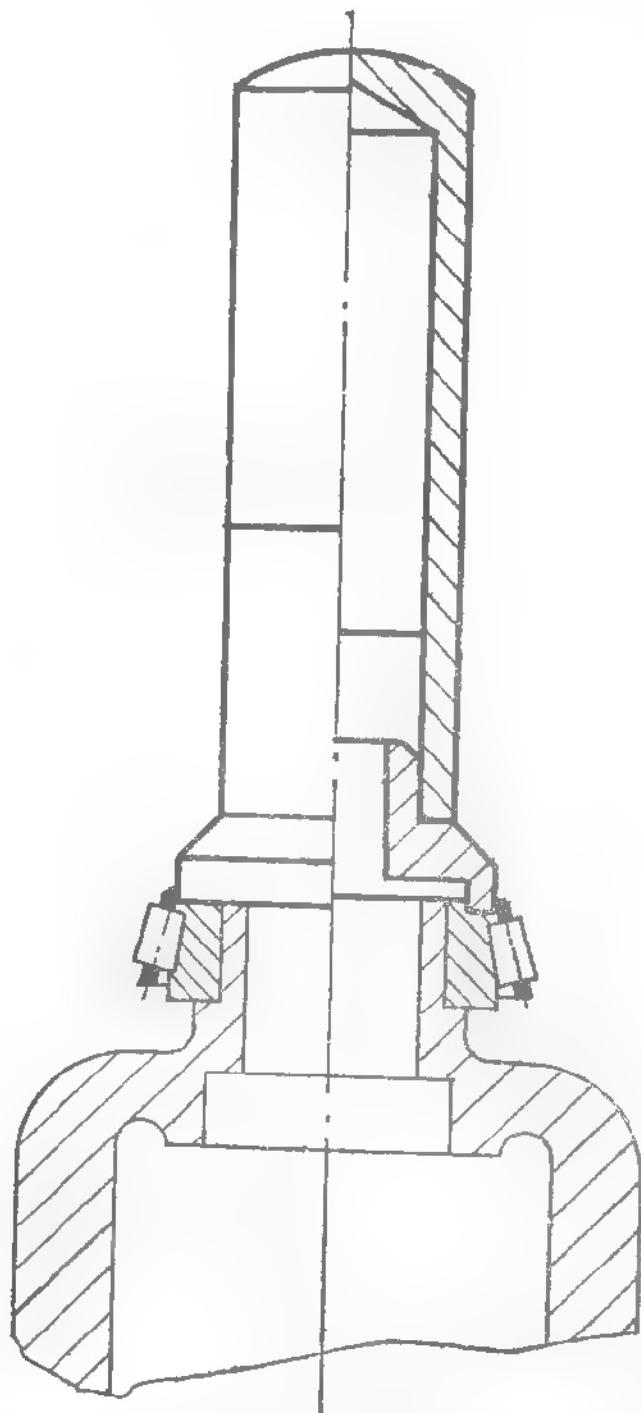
PRESSING DIFFERENTIAL CASE BEARING INNER RACE
